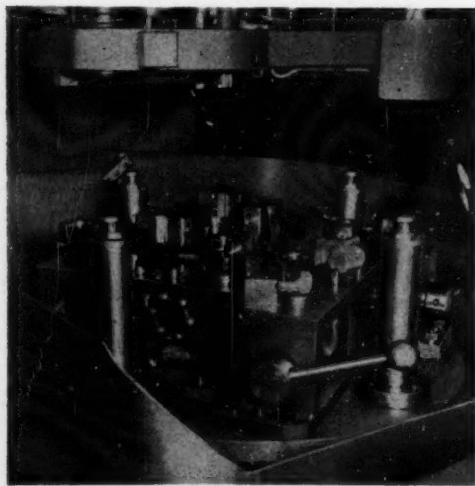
Close-up View of the 4-station Automatic Indexing Table on the Hüller Machine, Showing the Fixture Design
